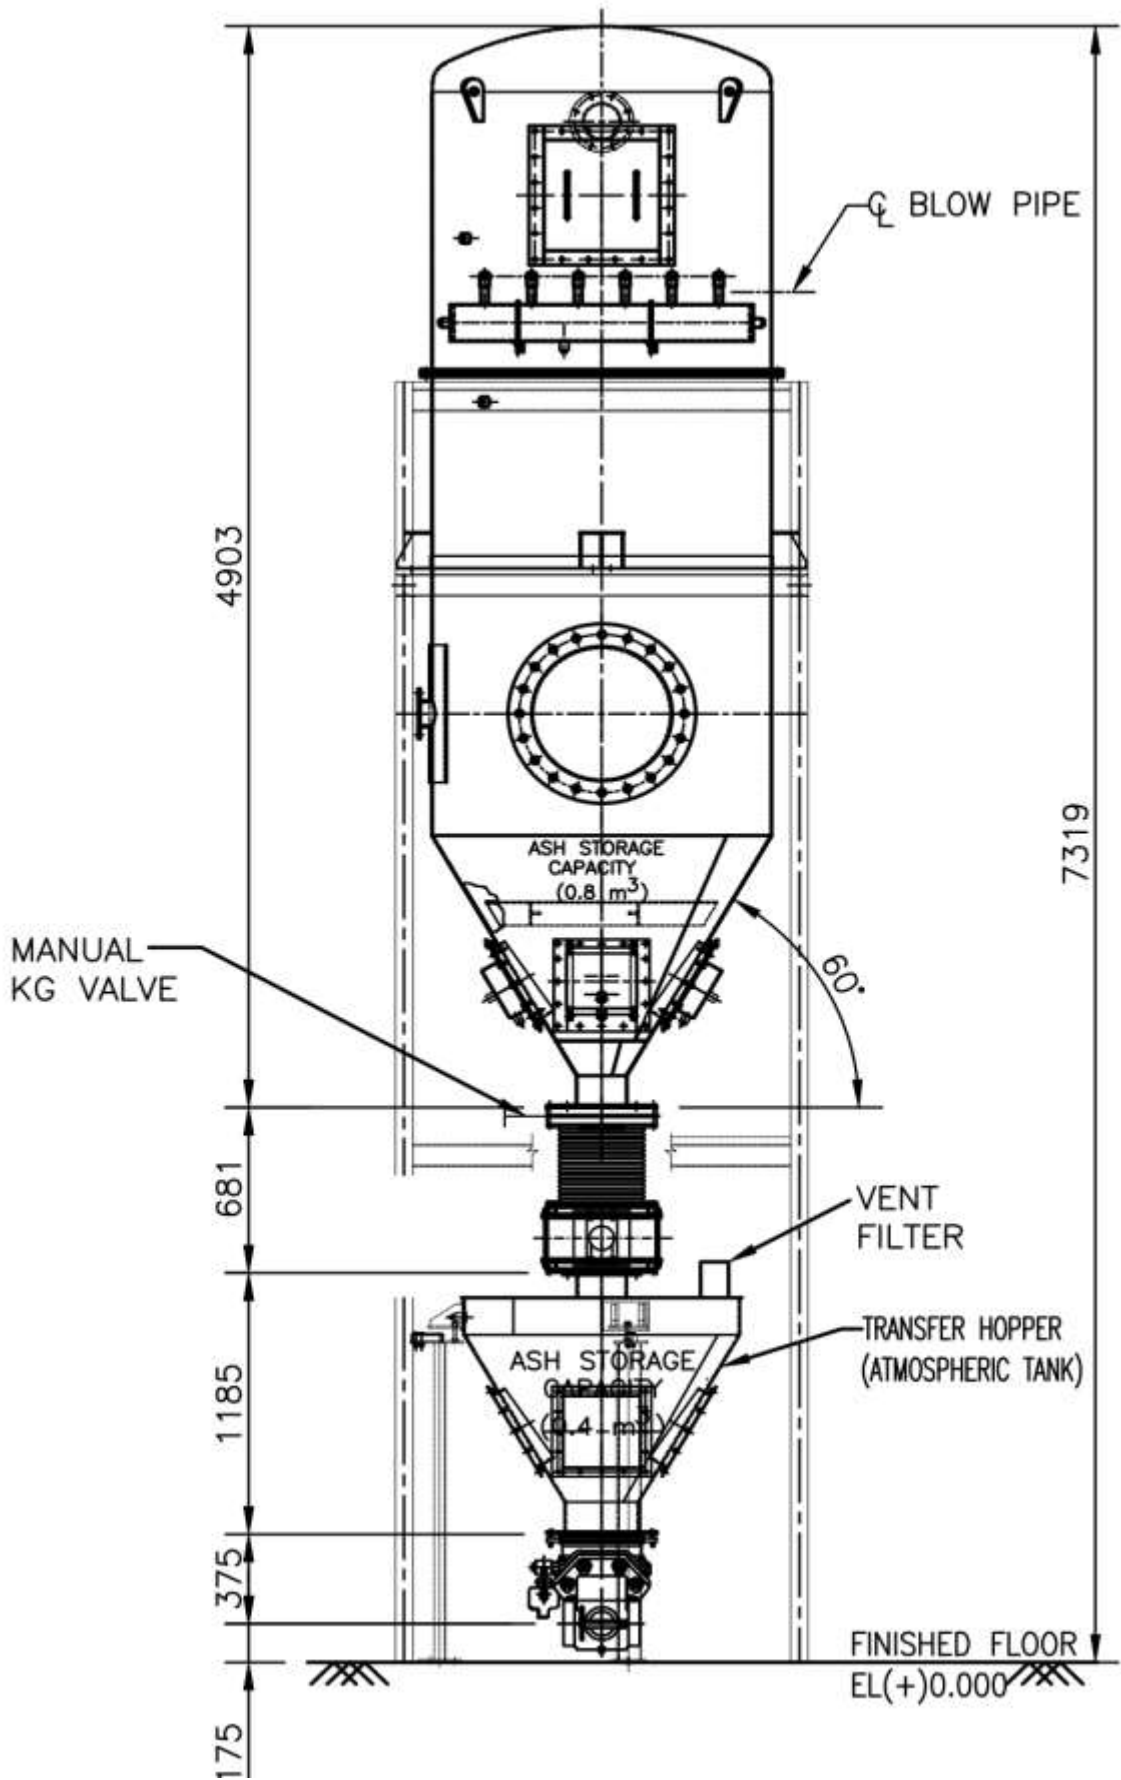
Side view of the negative pressure test rig stacked-up system assembly
